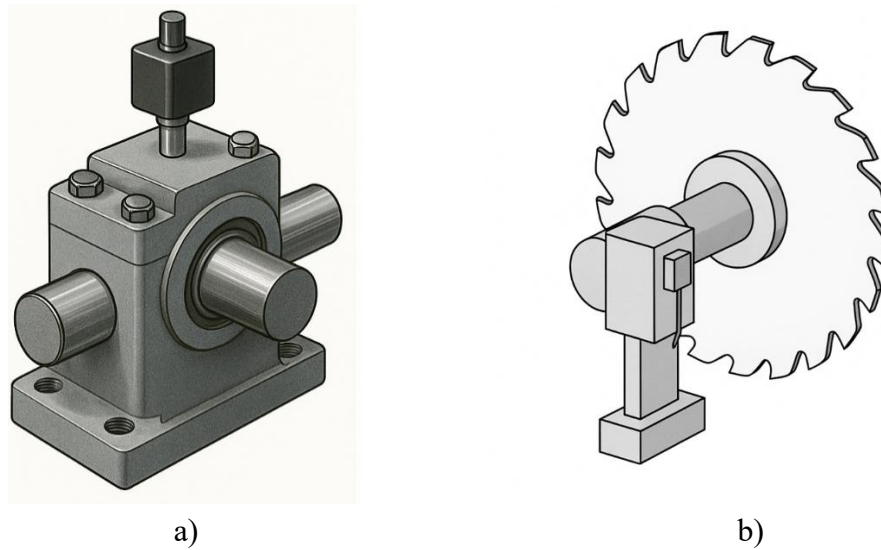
Vibration measurement locations in the saw gin machine: a) accelerometer on bearing housing; b) sensor mounted on blade hub.
